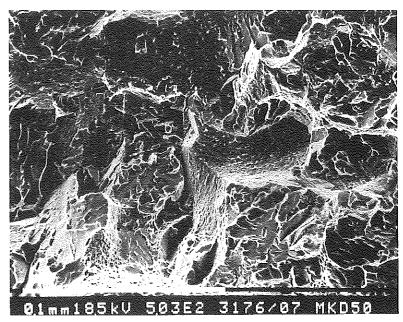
Fracture surface of Charpy specimen after SCHT tested at -50°C
